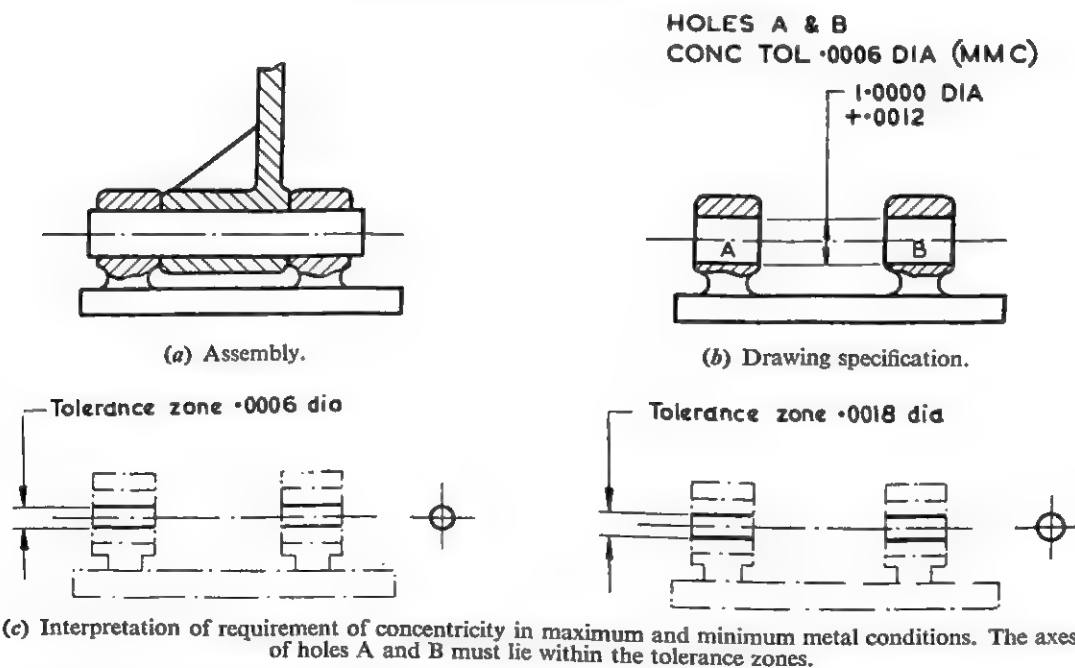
Tolerancing concentricity of holes to ensure assembly with pin. For detail specification of pin see Fig. 101
